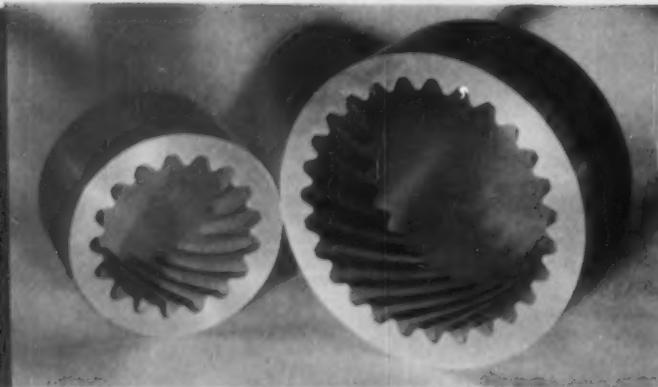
Inside teeth of these helical gears were cast using Alcoa plaster components.
